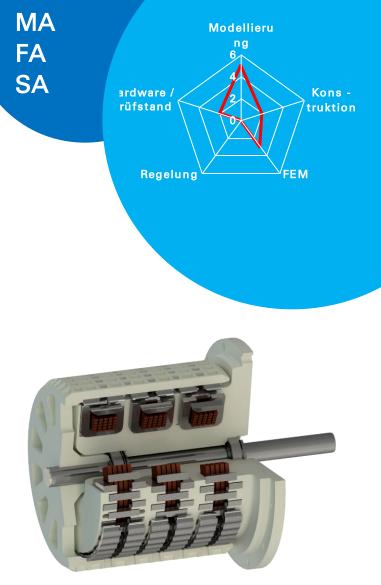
Sectional view of the investigated Transverse Flux Machine
